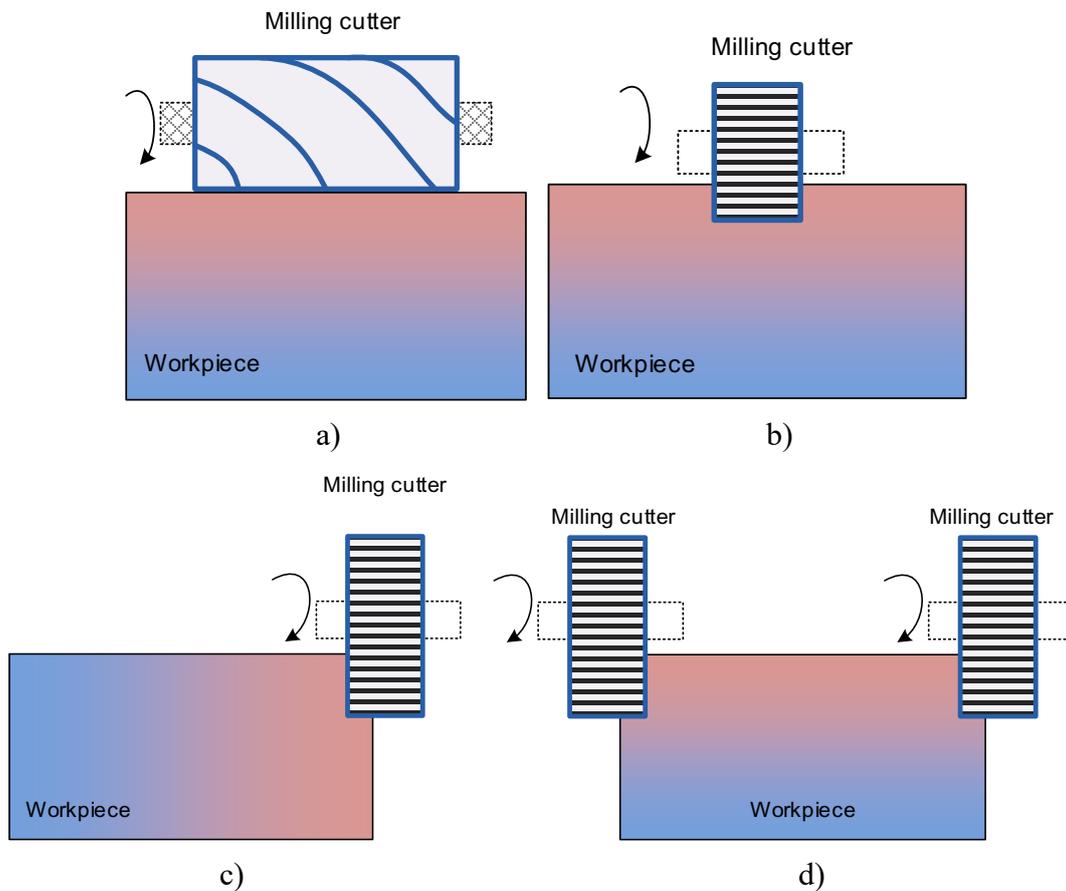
Schematic diagram showing peripheral milling operations a) slab milling, b) slot milling, c) side milling and d) straddle milling.
